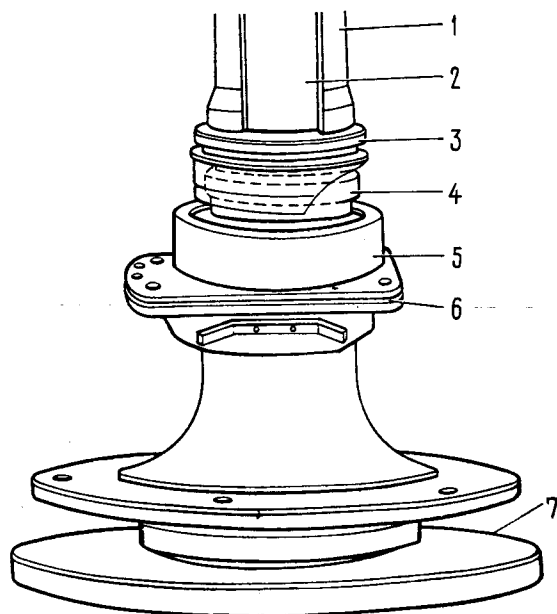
Press-Fitting Axle-Shaft Bearing Lockring:
